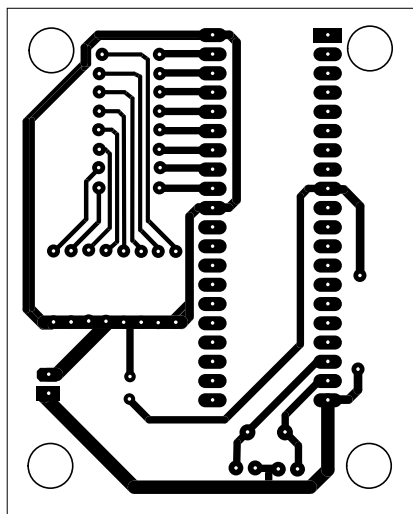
Actual-size, single-side PCB layout for the ring counter
